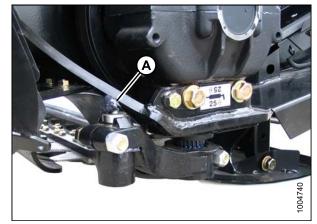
Knifehead A - Knifehead (Single Knife - 1 Place) (Double Knife - 2 Places)
